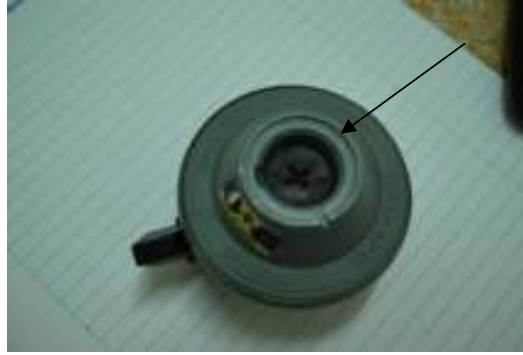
Pressure regulator screw adjuster that control the inlet opening
